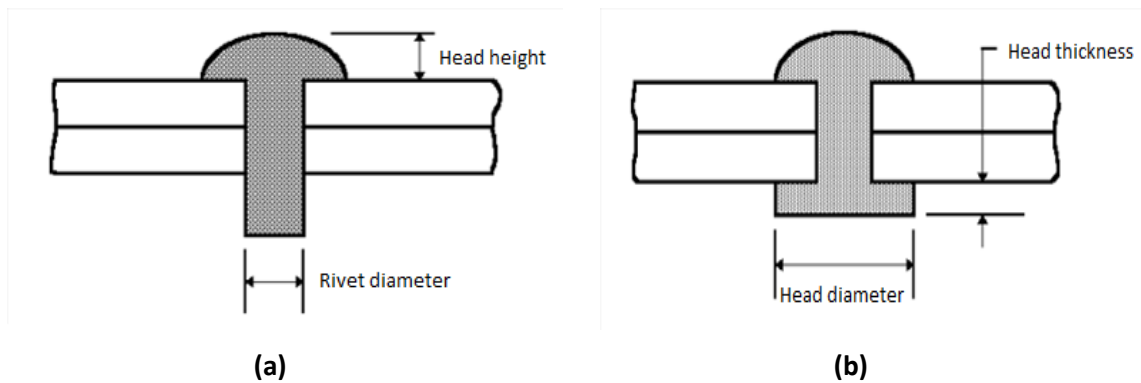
(a) Rivet pre-fit preparation, (b) After rivet squeezing.
